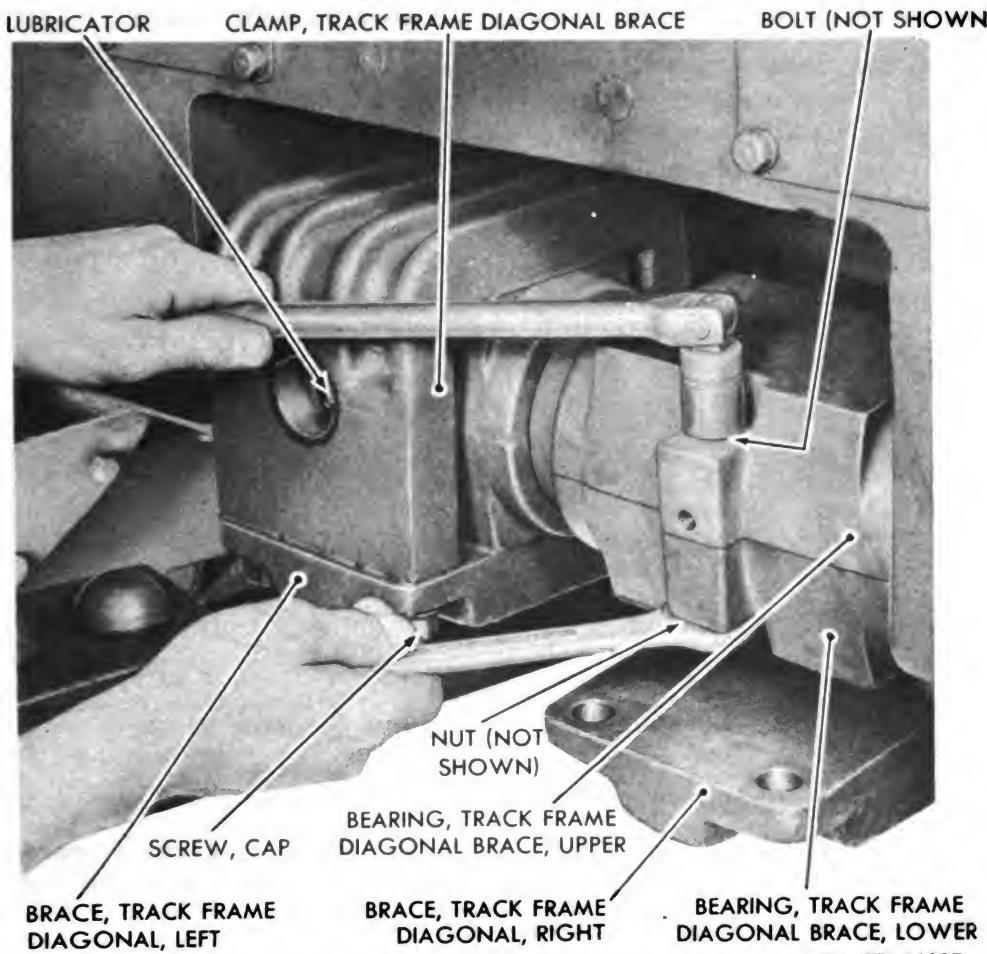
Track Frame Diagonal Brace Bearings Removal
